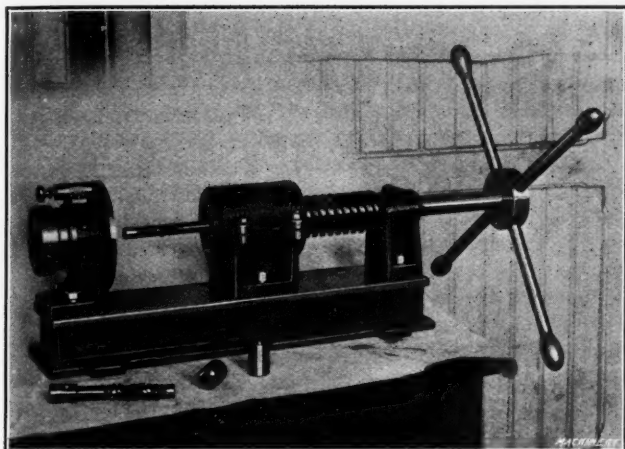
Fixture for tapping Brass Bushings of Coarse Pitch
